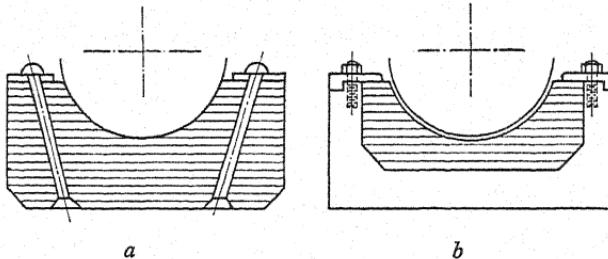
Bearing Composed of Laminated Materials Bolted together
